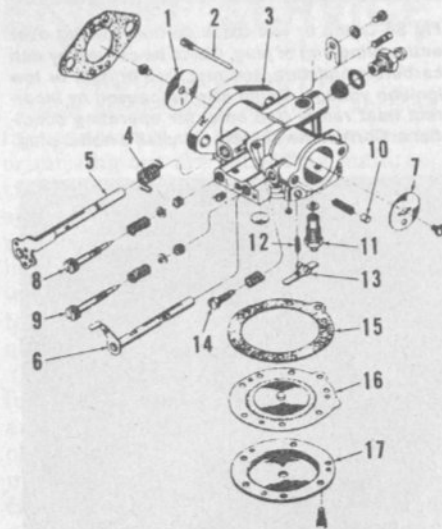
Exploded view of Tillotson Model HC carburetor. Model HJ is similar.
